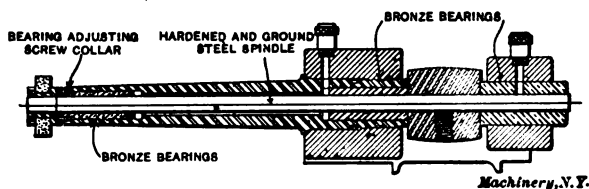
Common Construction of Grinding Heads for Internal Grinding.
